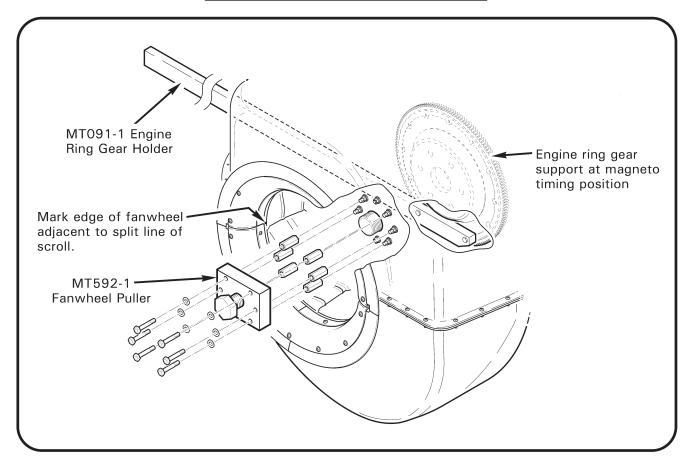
FANWHEEL PULLER INSTALLATION
